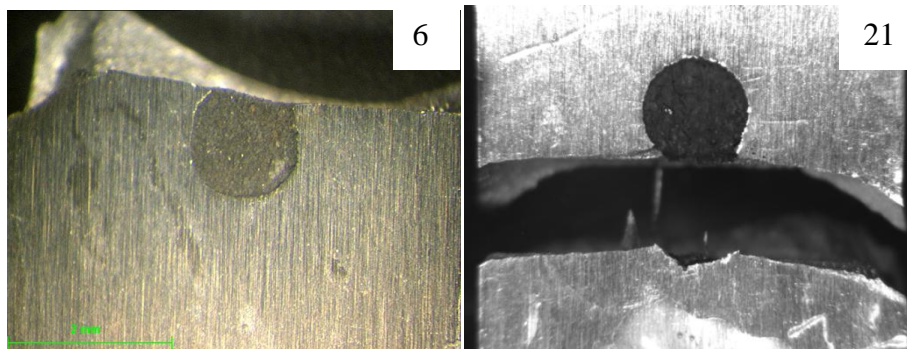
Specimens 6 and 21 - Fatigue crack development displaced from the largest diameter of the flaw
